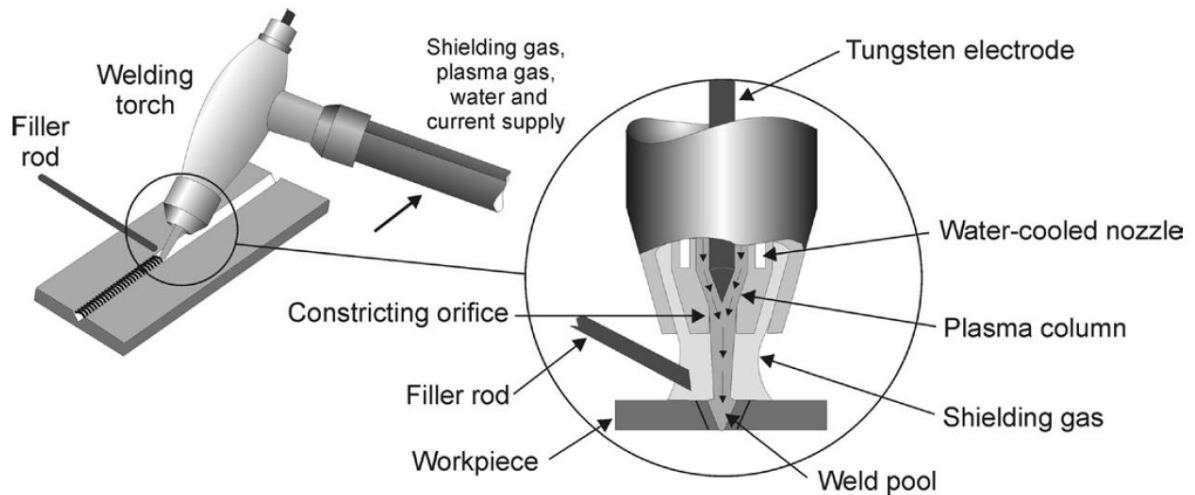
Plasma Arc Welding Equipment (Swift & Booker, 2013).
